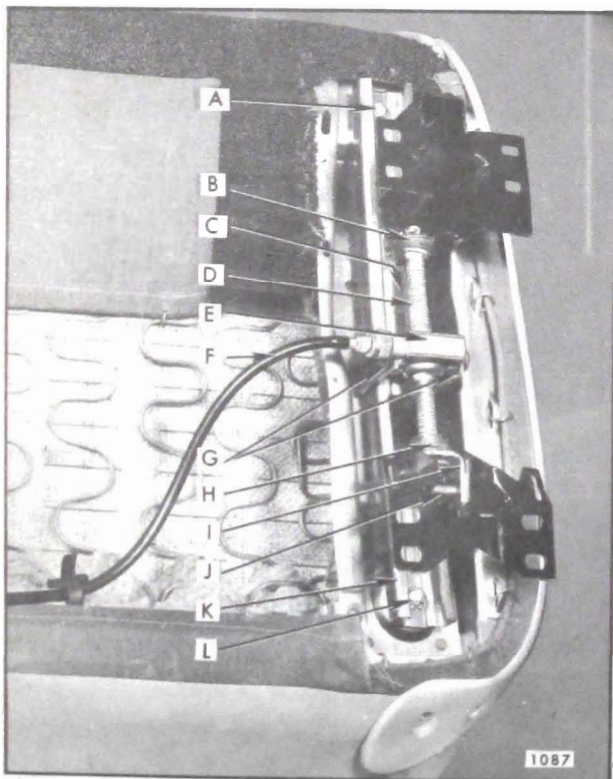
Horizontal Power Adjuster - "C & E" Styles
